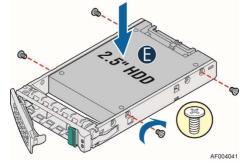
2.5" Storage Device Installation – Mounting drive to carrier
